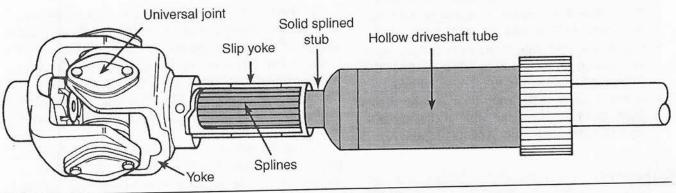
Driveshaft slip splines. (Courtesy of Chicago Rawhide)
